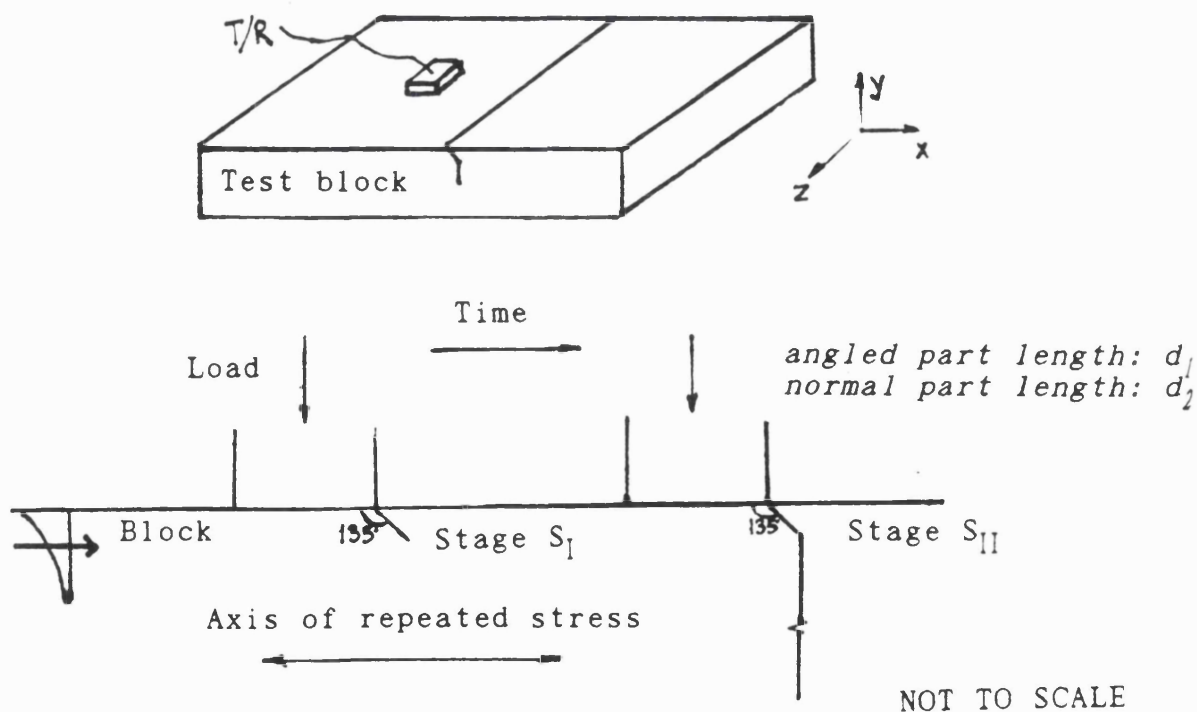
Modelling of fretting fatigue cracks
